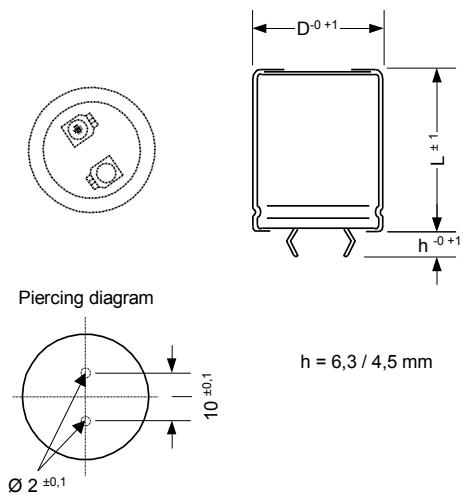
SIG : Standard 2 pin snap in version and mounting hole dimensions (mm)
